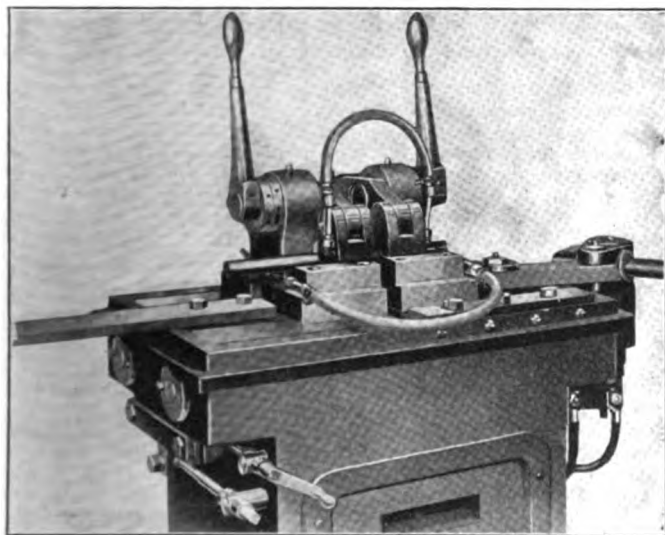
BUTT WELDER WITH WORK IN PLACE
